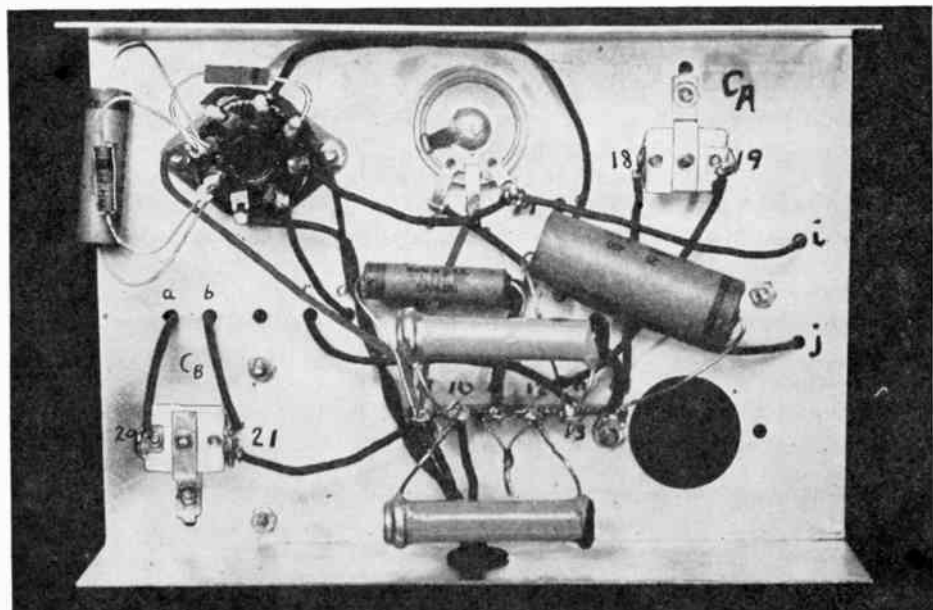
The bottom of your r.f. chassis should appear like this after you have completed the assembly instructions given in Step 1 of Experiment 47.
